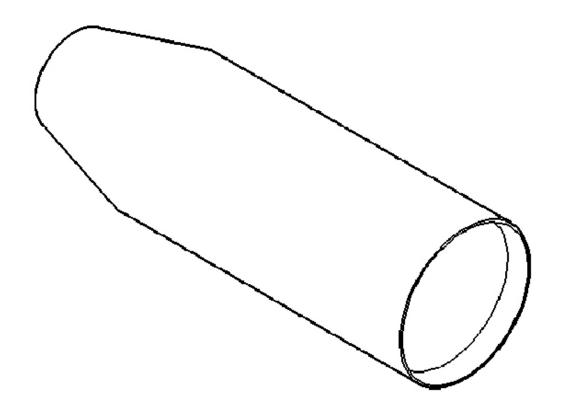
Crankshaft Seal Protector 6780-2 Courtesy of CHRYSLER LLC
